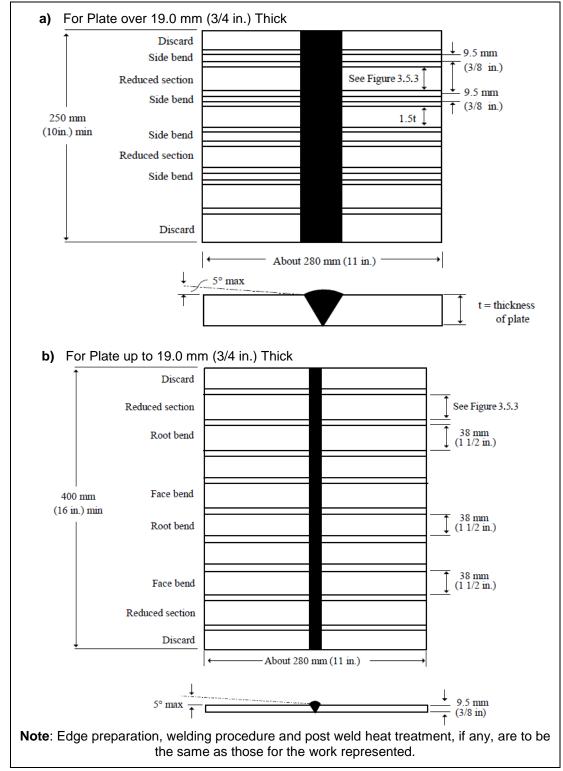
Preparation of Test Plates and Pipes for Weld Tests Nos. 1 and 2
